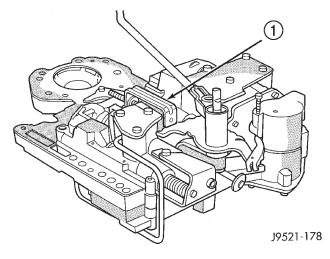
Detent Ball Spring 1 – SPECIAL TOOL 6583 POSITIONED ON DETENT HOUSING
